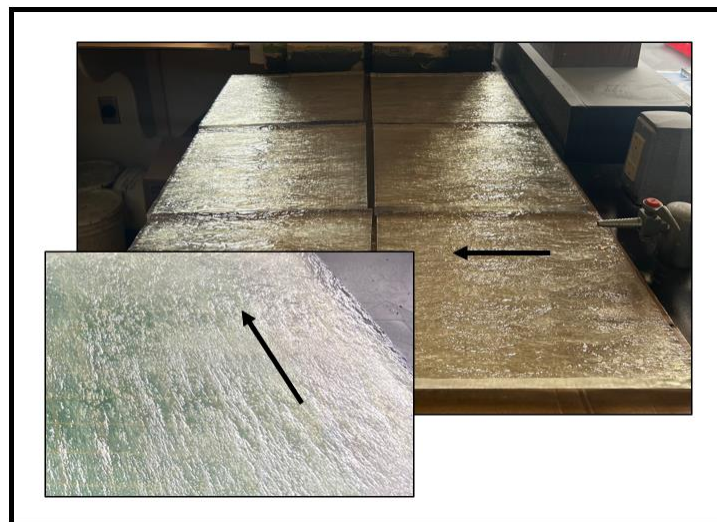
3D-Printed Fracture Tiles Prior to Assembly
